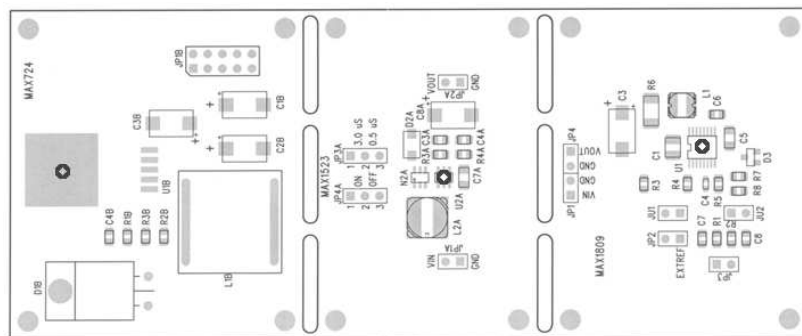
Custom board hosting the three MAXIM DC-DC converters; black circles indicates the DUTs.
